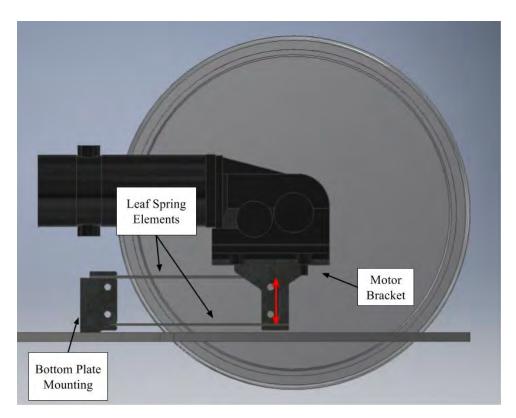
The leaf spring suspension mounted on the bottom plate
